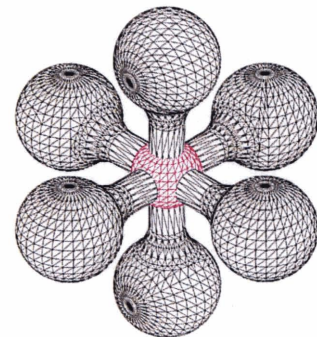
3D CAD model of a Glume module used for designing the casting molds.
